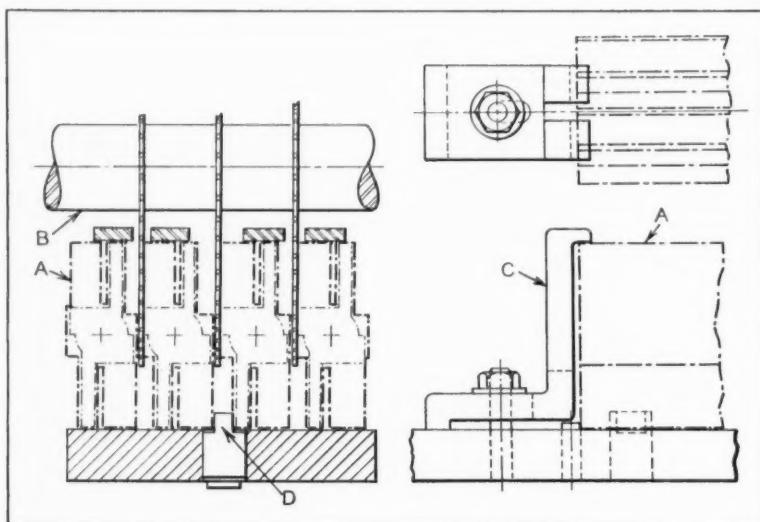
Fixture and Set-up for Sawing Steel Bar into Four Parts
